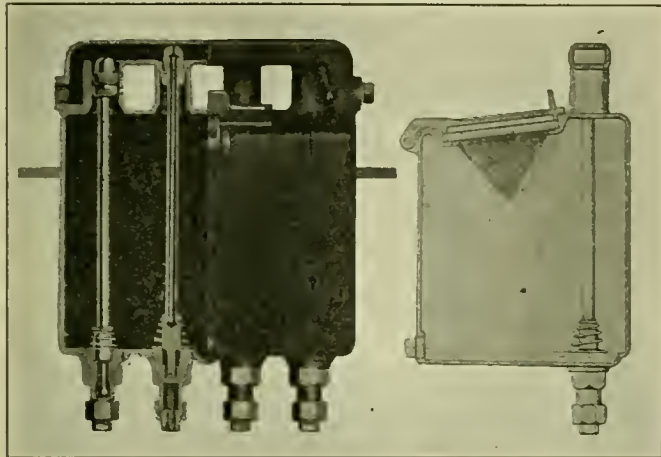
Hooper Four-Feed Automatic Flange Lubricator
